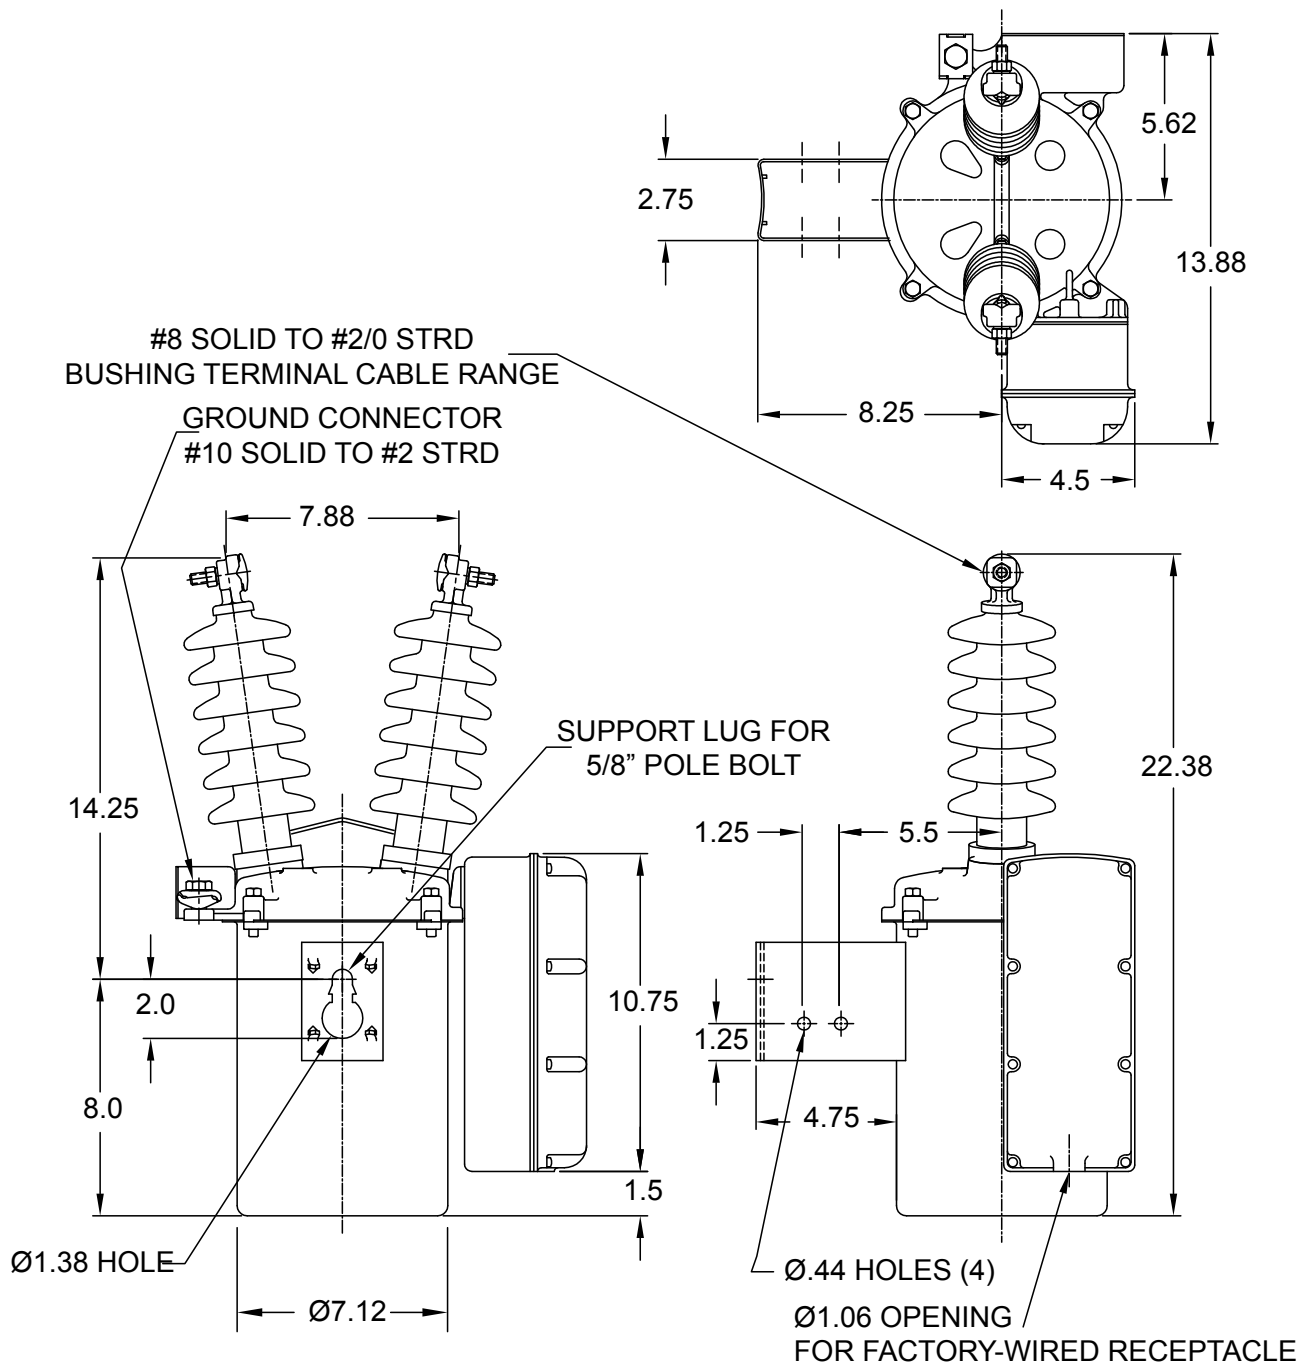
Outline dimensions of 95 kV BIL Type NR oil switch with 17" creepage bushings, (15.0 kV Rating ONLY).
